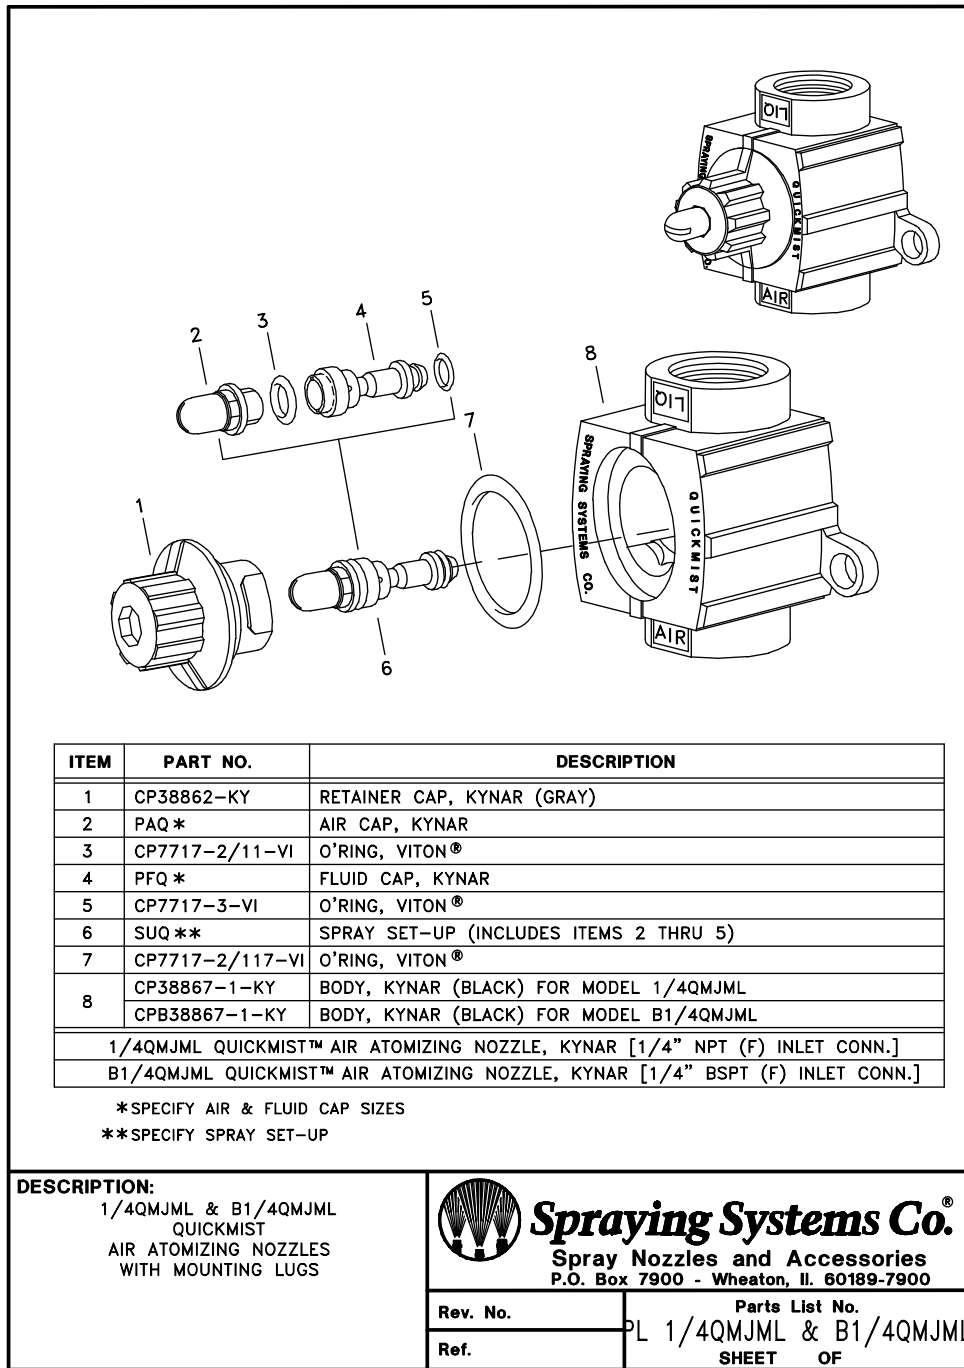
Nozzle assembly (courtesy of Spraying Systems Co.).
